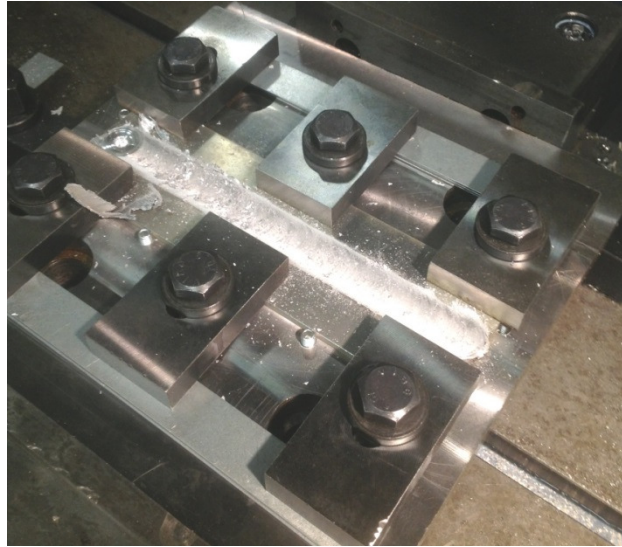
Plate after the welding process, before being removed from the support.
